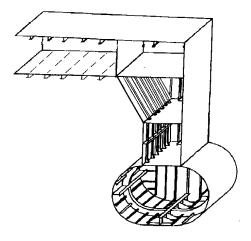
Proposed new structure of a SWA ship wet deck [3].
